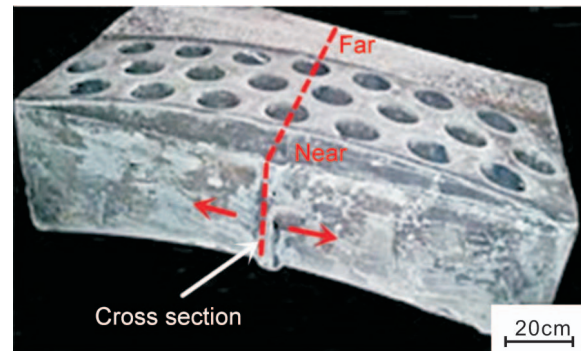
Appearance of squeeze casting composite parts (240 x 80 x 60 mm³)
